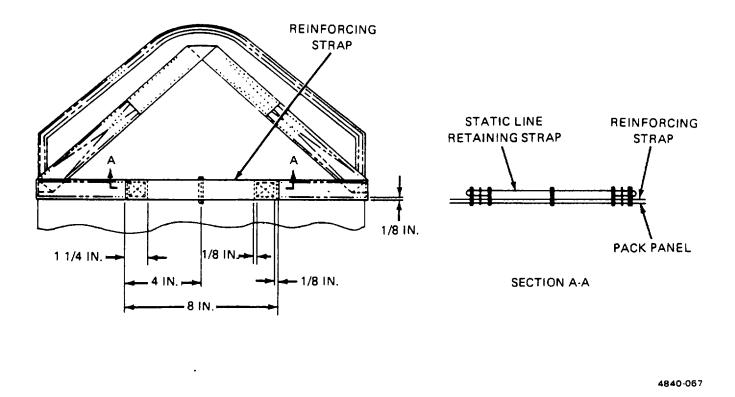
Pack Static Line Retaining Strap Attachment Details.
